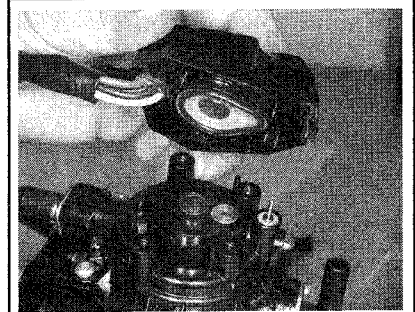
Unless there are signs of weepage, there is usually no reason to remove the electronics module from the top of the inlet housing
